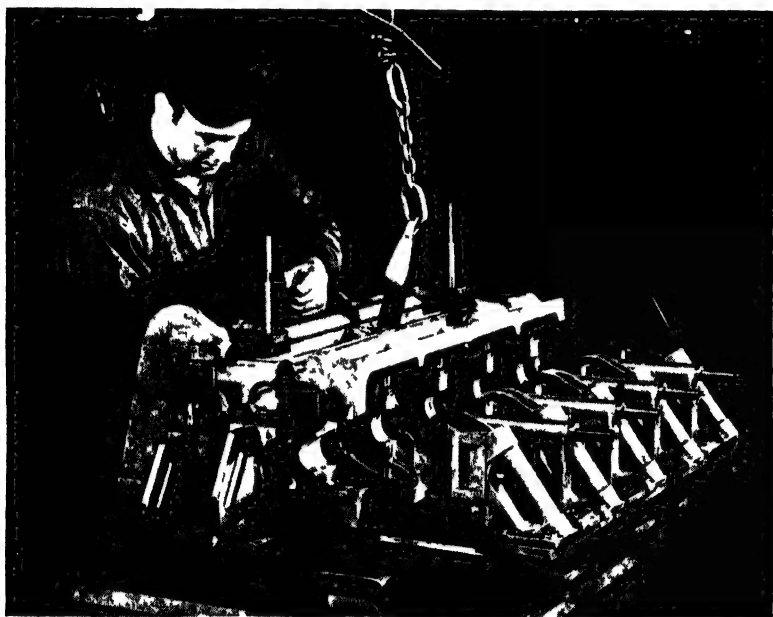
Inspecting Pontiac cylinder blocks before they go to machine shop.
